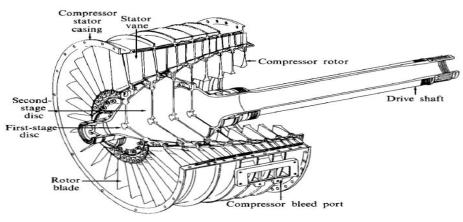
Cutaway sketch of a typical axial compressor [2]
